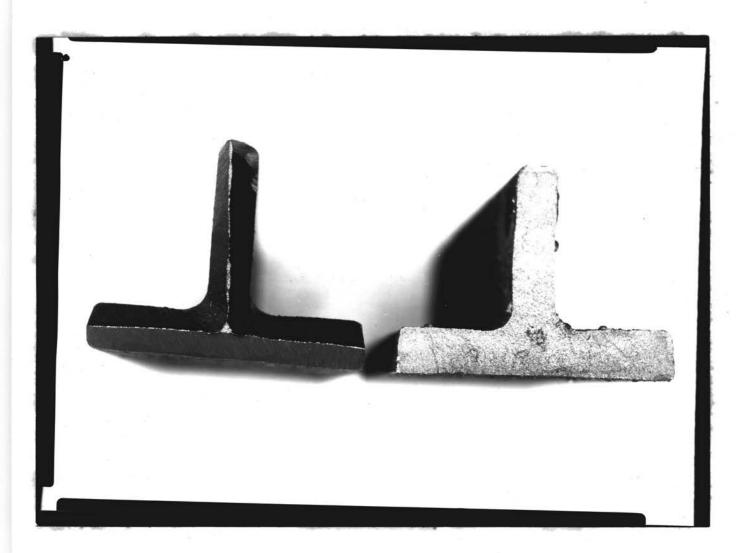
Figure 3A shows the beam as beveled for welding with the correct angle of 90° ground on the fractured edge. Figure 3B shows the cross section of the beam as fractured.
